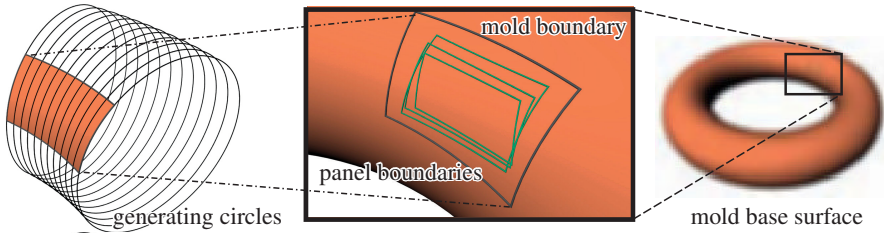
Example of mold reuse. Panel boundary curves are in general not congruent. However, several panels may be closely grouped together on the same mold base surface. In that case the same mold or machine configuration, which embraces all affected panels, may be used to manufacture the panels. This figure further illustrates how the congruent profiles of a rotational or translational surface, in this case the circles generating a torus, can be exploited for mold fabrication.
